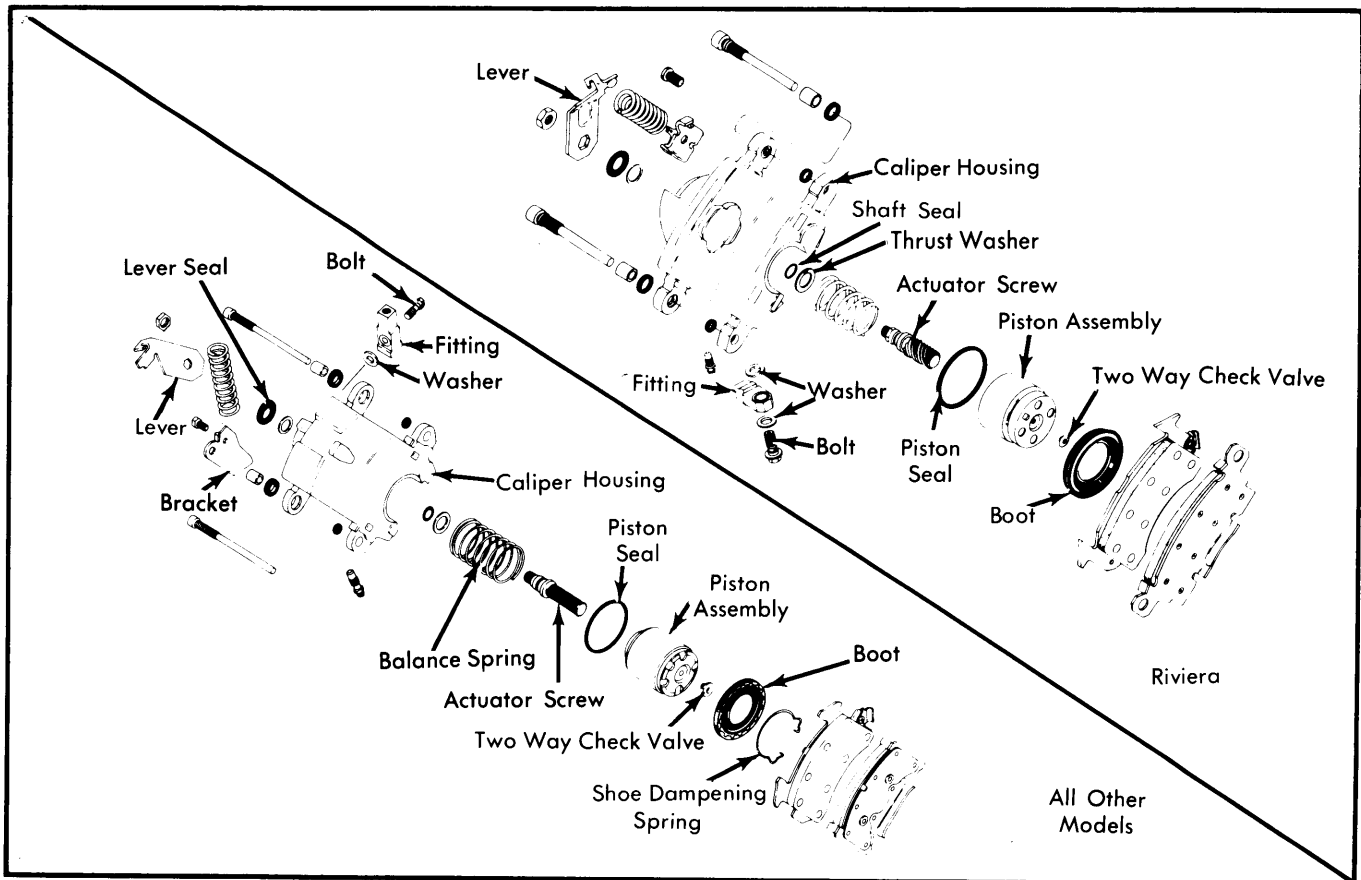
Exploded View of Delco-Moraine Single Piston Rear Caliper
